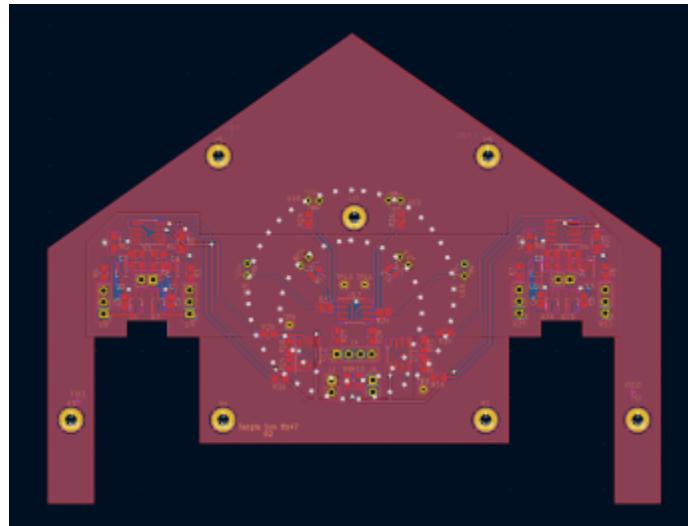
PCB view of the layout, with inserted rings for the photo transducers
